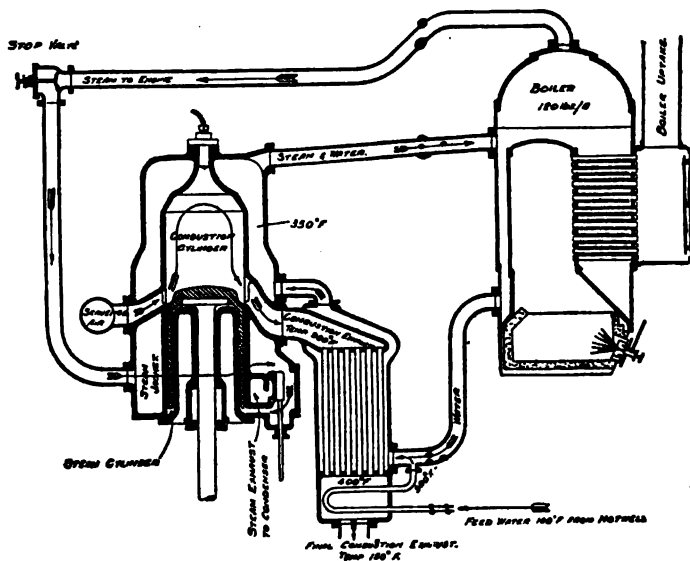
SEC. 10y.—Diagram showing arrangement of Still engine.
